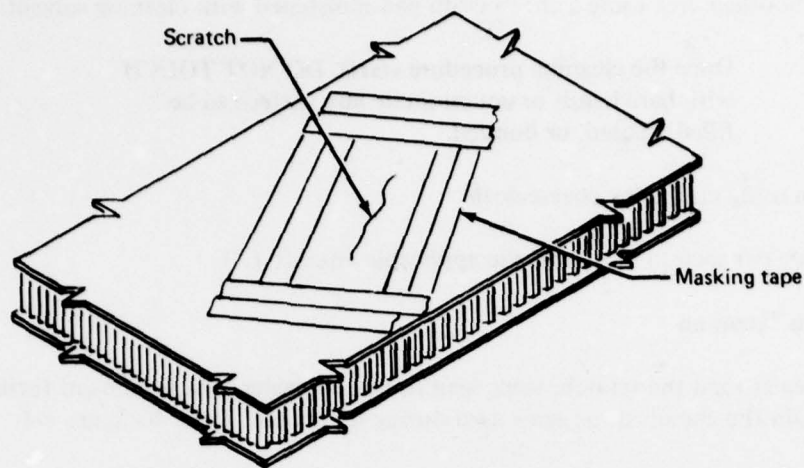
Application of Masking Tape Prior to Surface Cleaning
